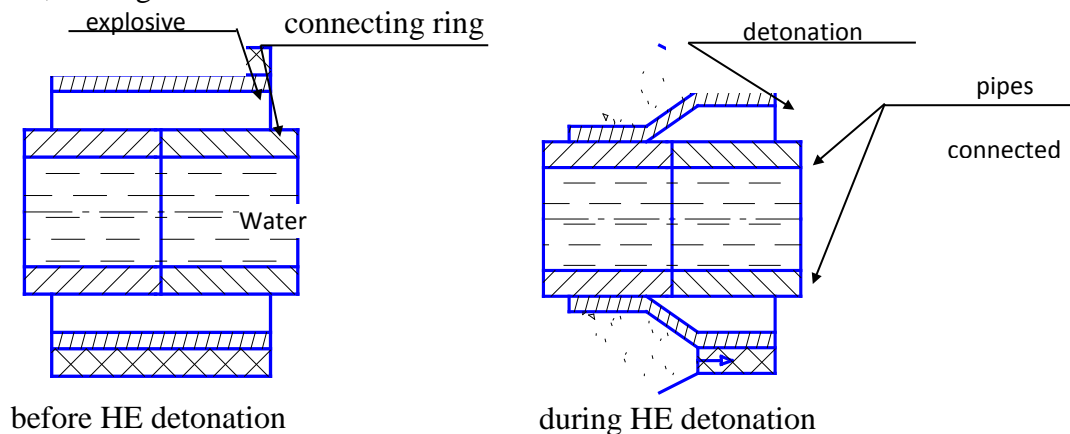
Scheme of explosive welding of pipes with use of water as filler.
